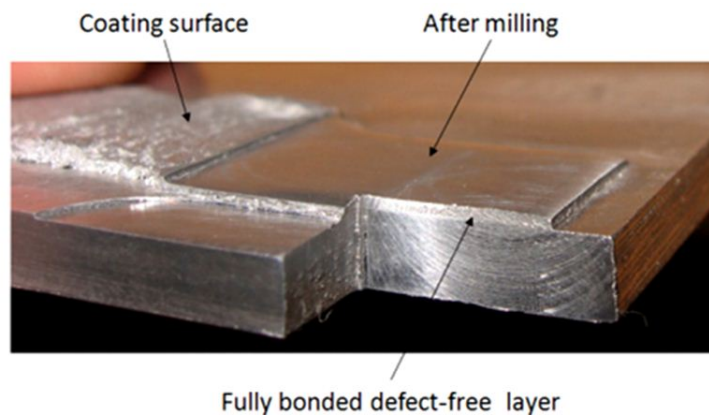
Surface finish by milling. FS of AA6082-T6 over AA7178-T6.
